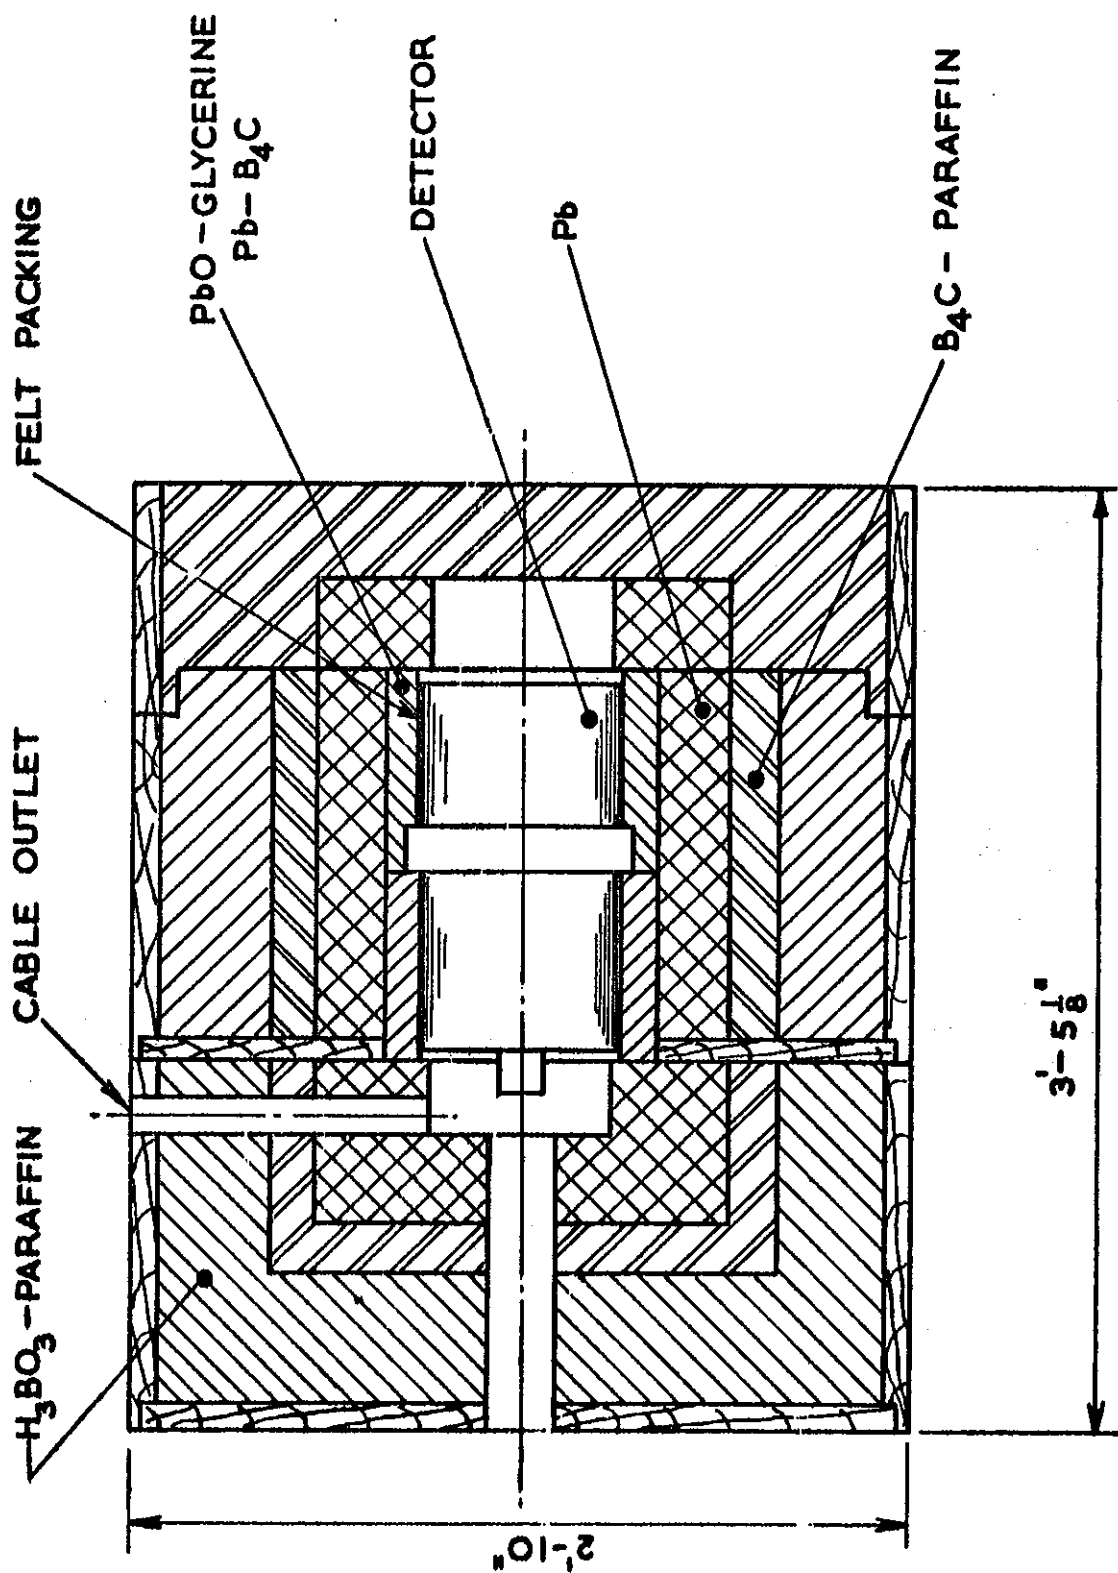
LONGITUDINAL SECTION THROUGH THE SHIELDING ASSEMBLY
